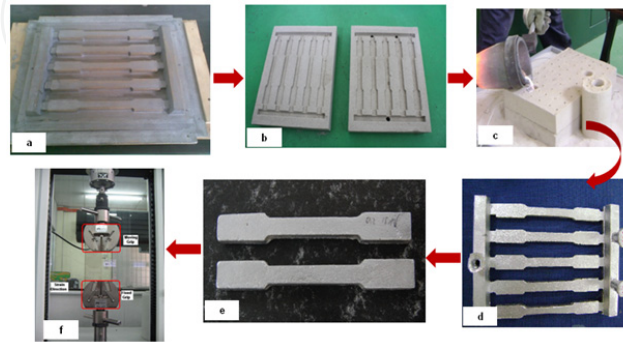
The casting processing steps; (a) Pattern of mould (b) sand mould : drag and copper (c) melting and pouring in the sand mould (d) tensile specimens with gating system (e) tensile specimen after removing of gating systems (f) tensile testing
